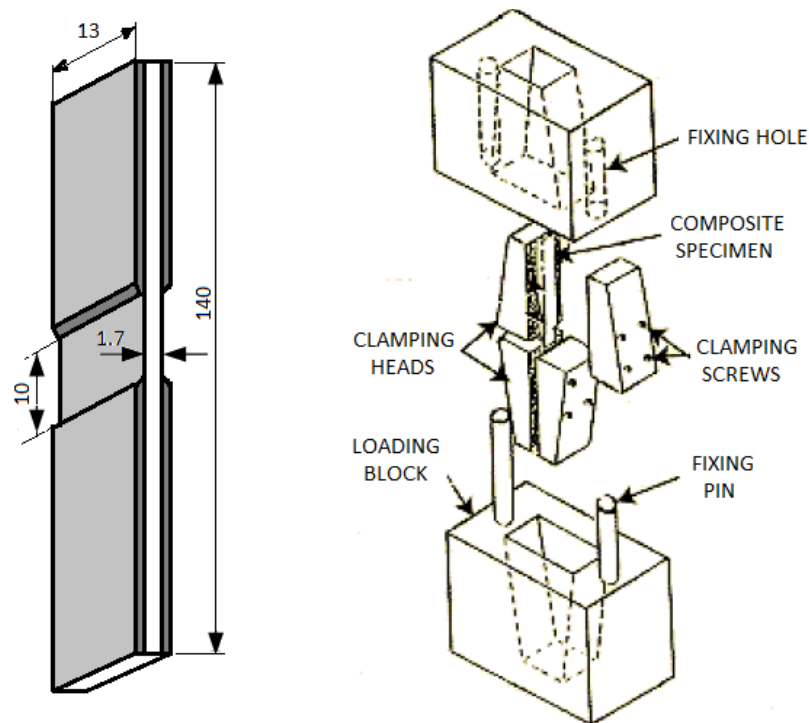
Test specimen geometry and dimensions for compressive loading and its test fixture
